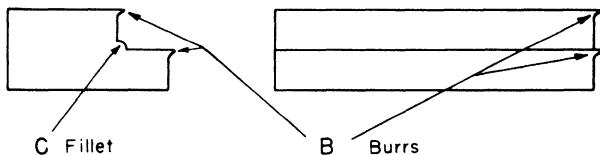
Although blueprint calls for sharp corners, burrs and fillet may be produced by machining.
